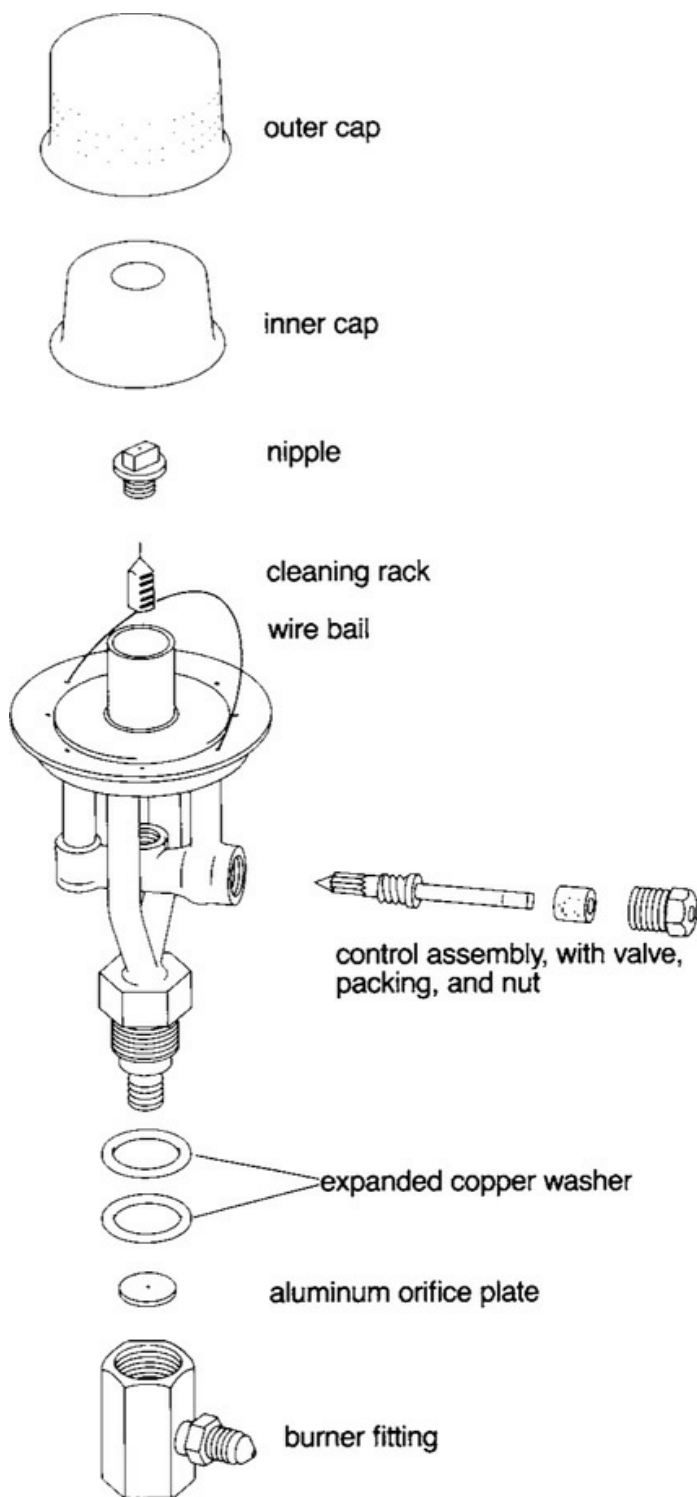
A. An exploded view of a kerosene burner. (Jim Sollers)
